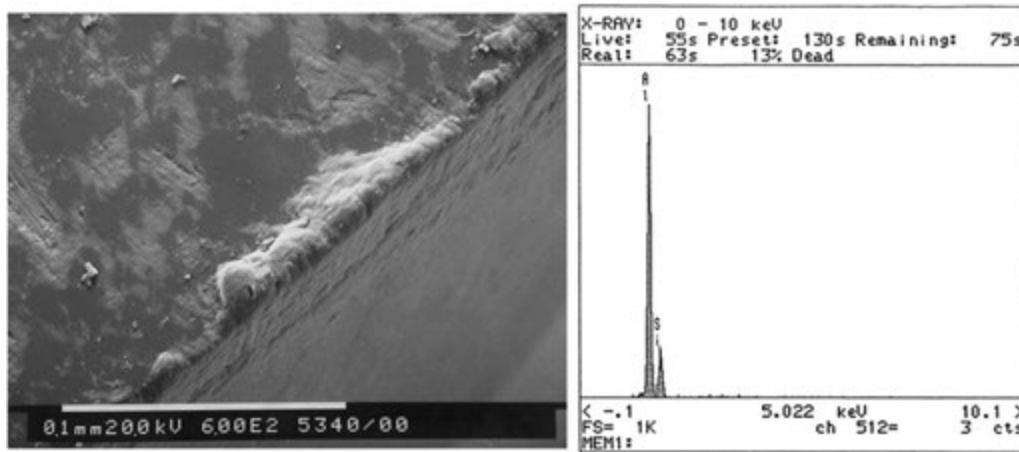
Development of built-up edge on PCD tools and its x-ray dispersion profile Reproduced from El-Gallab, M., Sklad, M., 1998. Machining of Al/SiC particulate metal matrix composites Part II: Workpiece surface integrity. *Journal of Materials Processing Technology* 83, 277–385.
